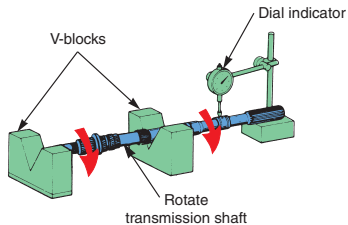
Input and output shafts can be checked for bends or warpage using V-blocks and a dial indicator. Never attempt to straighten a bent or warped shaft. (Toyota)
